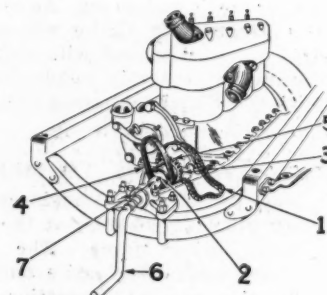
Installing crankshaft sprocket, silent chain and fan belt in mounting Gray & Davis
